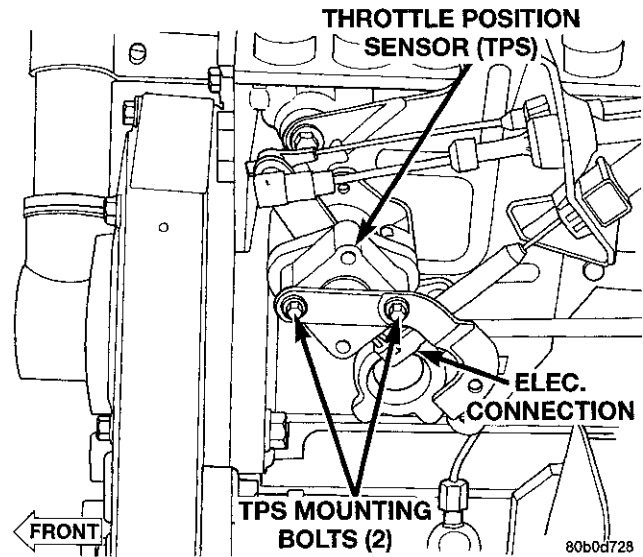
Throttle Position Sensor Location—Diesel Engine
